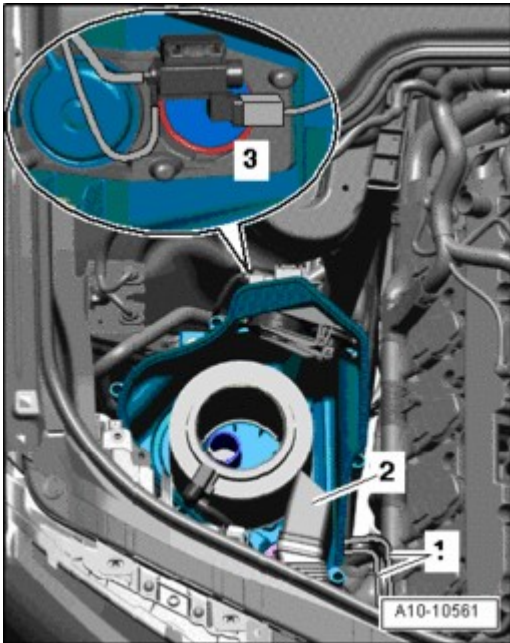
Vacuum Hoses, Air Duct, Bolts & Intake Air Switch-Over Valve N335 Electrical Connector
